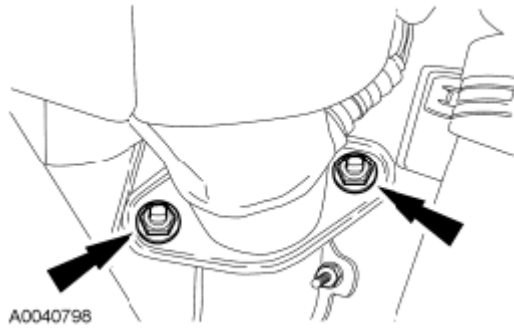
Locating Exhaust Manifold-To-Catalytic Converter Nuts
